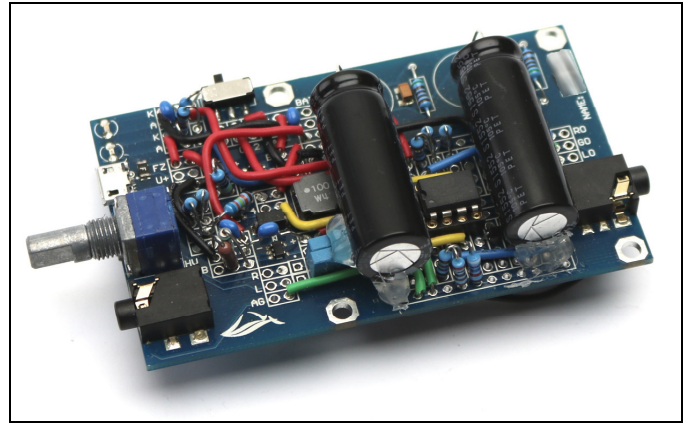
An example completed headphone amplifier design on the development board of Fig. 2. The design blends implementation with surface mount components as well as through-hole components and jumper wires. The final design is completely soldered with the exception of a socket-connected DIP-8 operational amplifier, allowing different amplifiers to be tested to verify harmonic distortion with different quality amplifiers.
